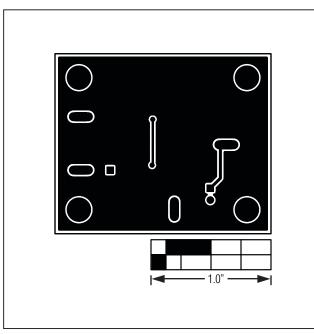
MAX9911 EV Kit PCB Layout—Solder Side
